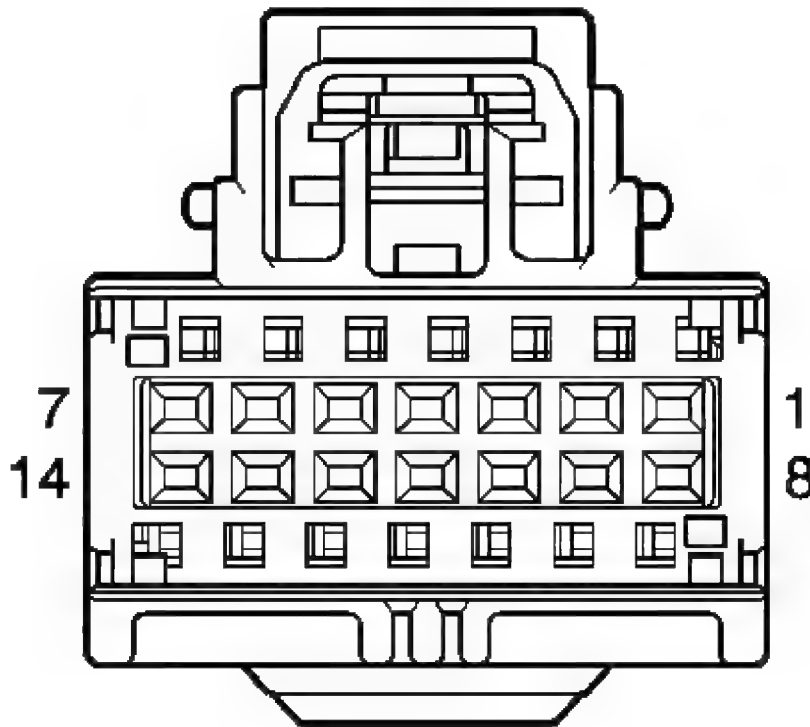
Front Passenger Heated & Cooled Seat Switch (KA1/KB6) Connector End View
